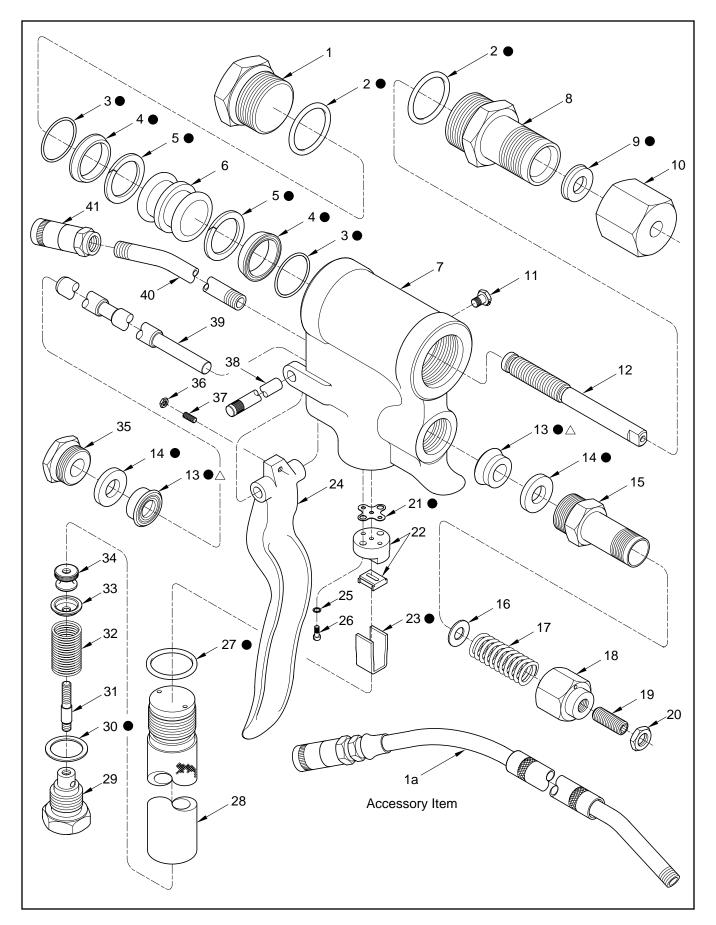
High-Pressure Measuring Control Valve Model 7716-D1 - Exploded View
